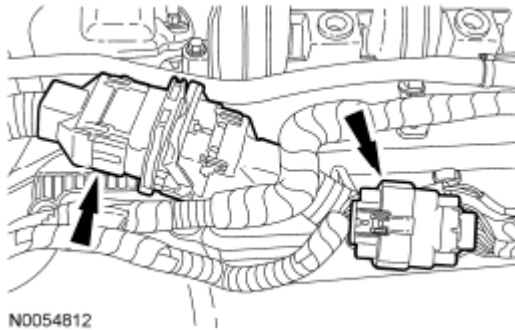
Locating Engine Control Wiring Harness Electrical Connectors
